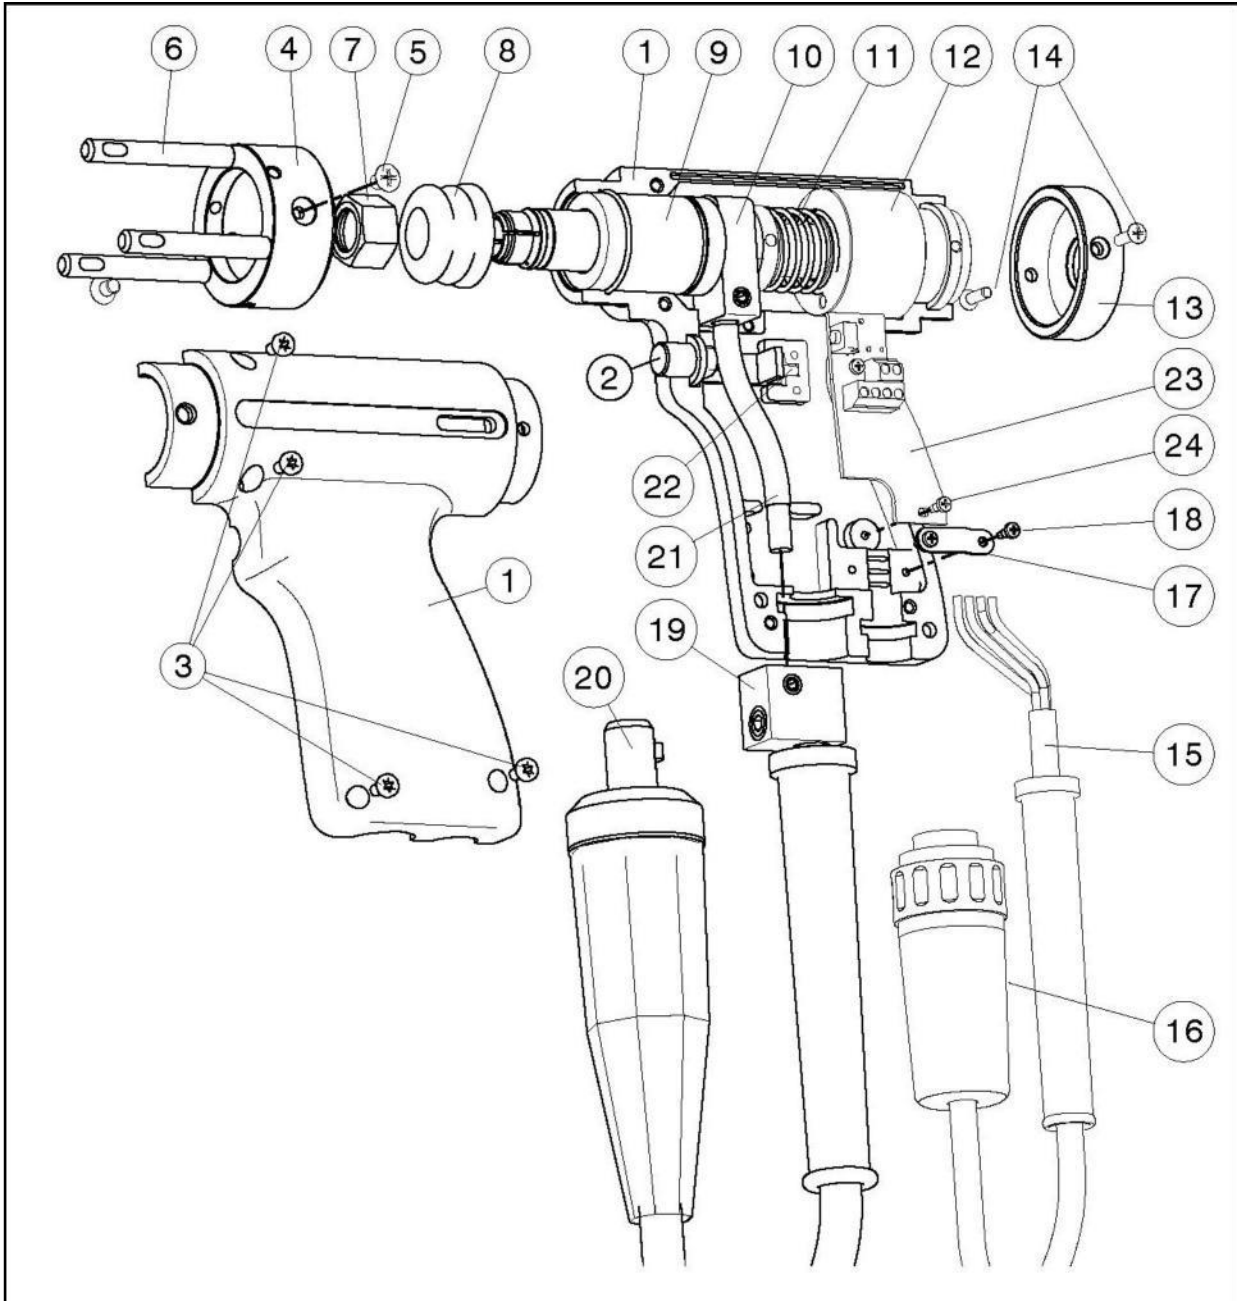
Detailed view of the ESP 1 S welding gun (gap welding)
